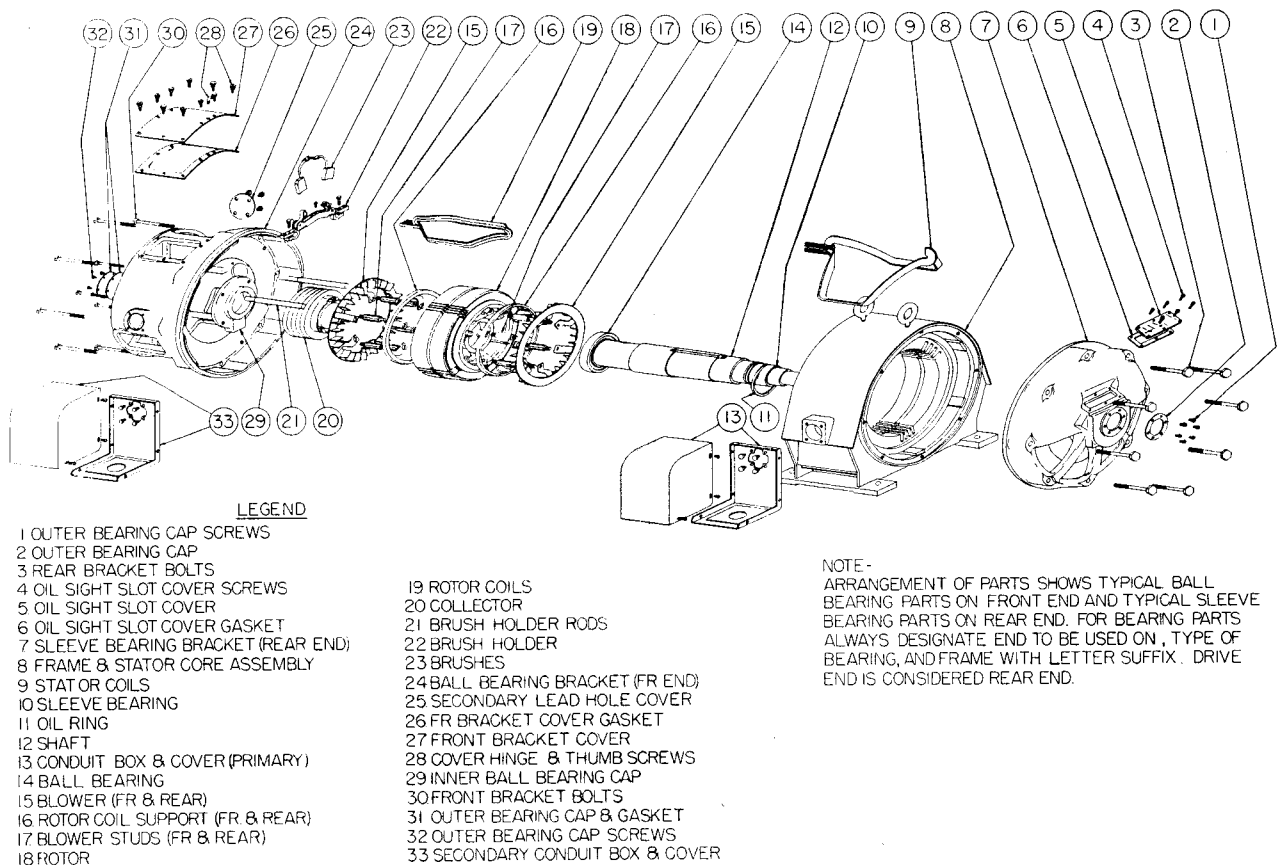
Arrangement of Parts—Drip-Proof Type CWP Motor (Frames 580-683)
